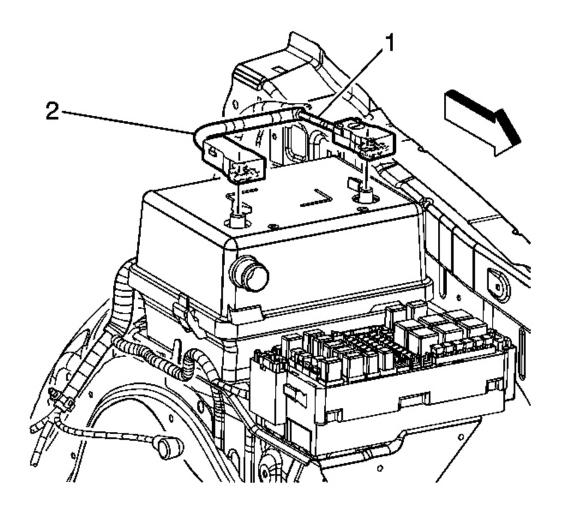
Battery Cables Courtesy of GENERAL MOTORS CORP.
